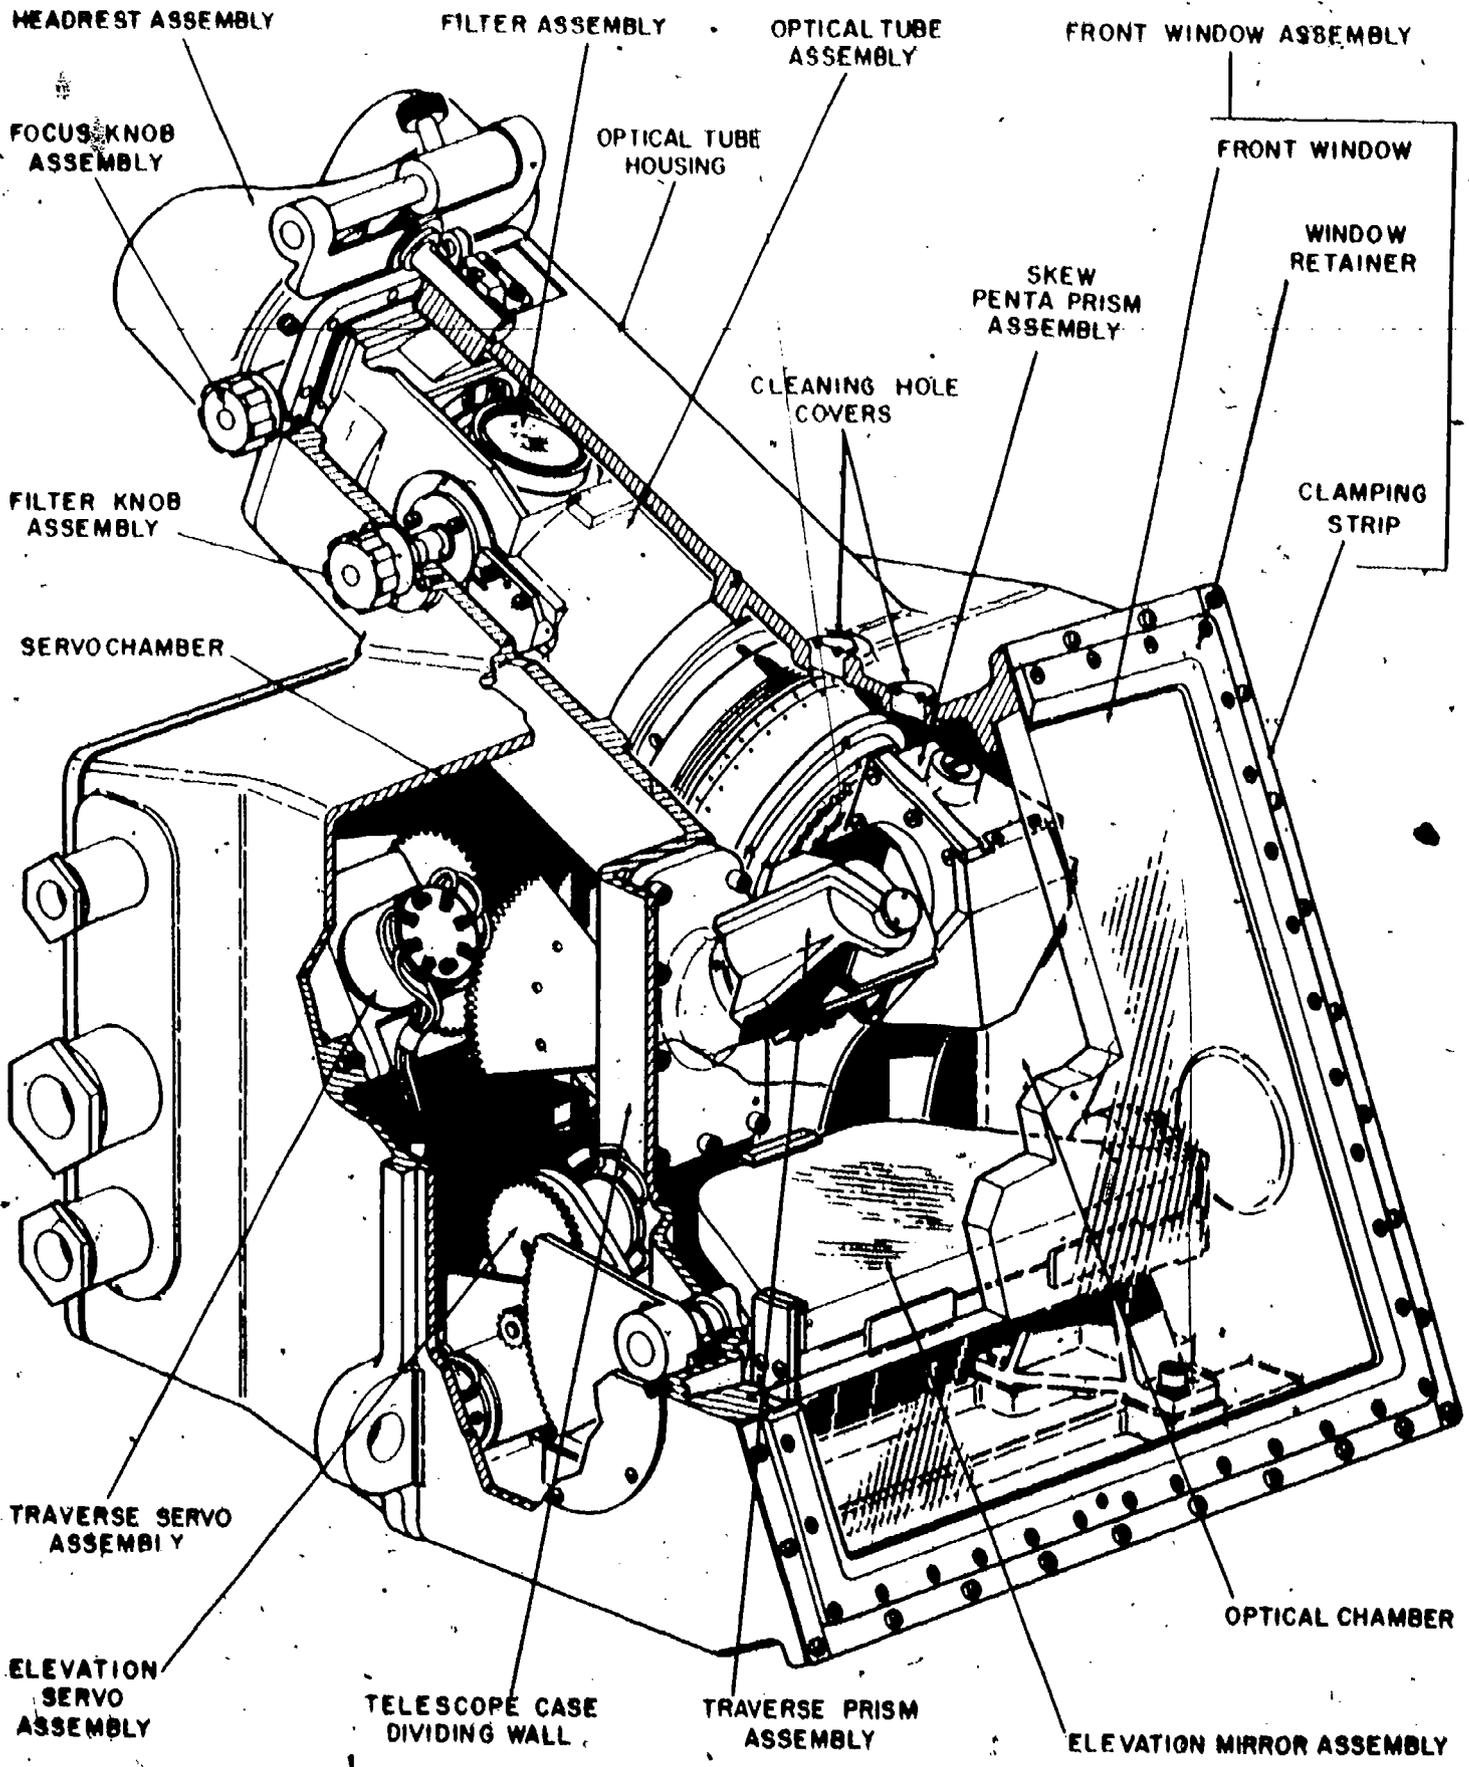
Telescope Mk 102 Mod 2; cutaway view.
